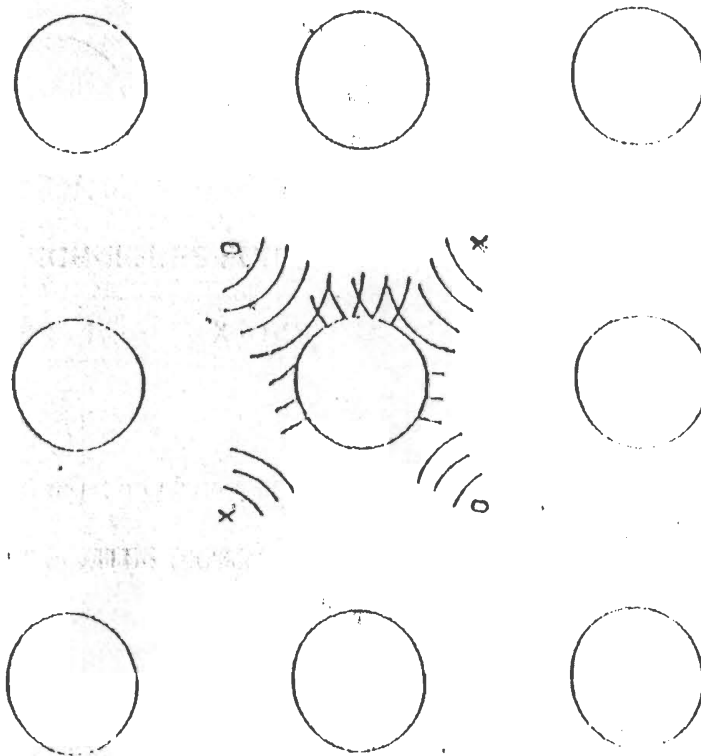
TECHNIQUES FOR EXAMINATION OF FILLET WELDS
